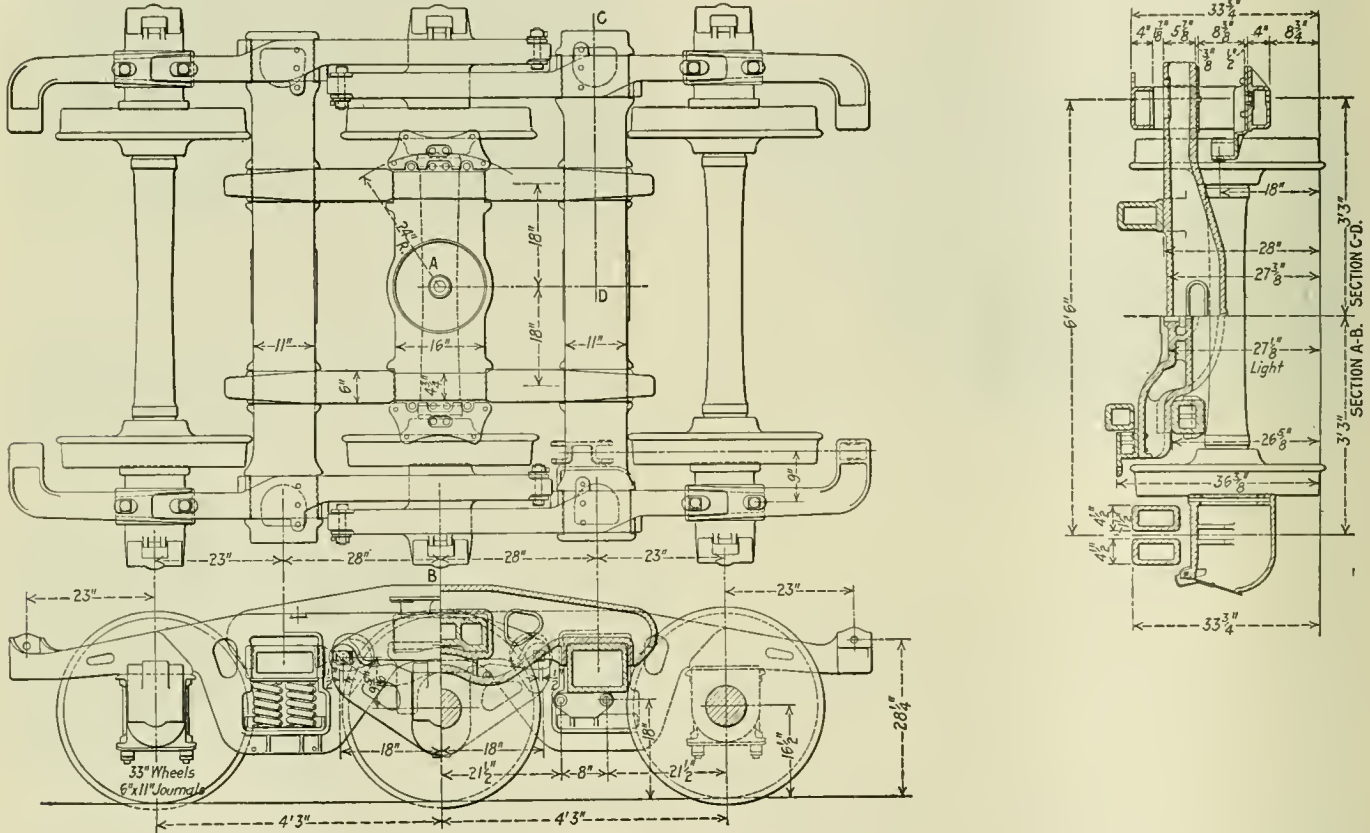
Assembly of the Buckeye Six-Wheel Truck
